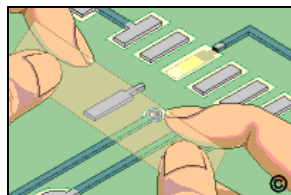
Place the new surface mount pad in position using Kapton Tape.
